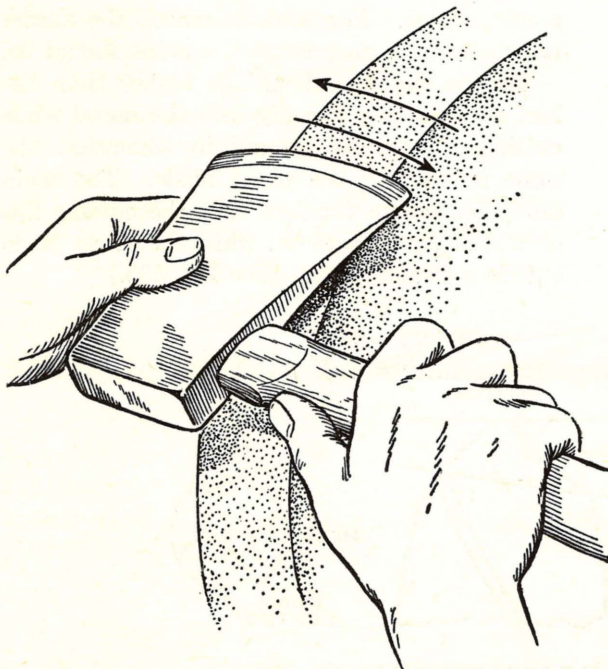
An axe should be rotated slightly as the cutting edge is moved back and forth across the face of the wheel
